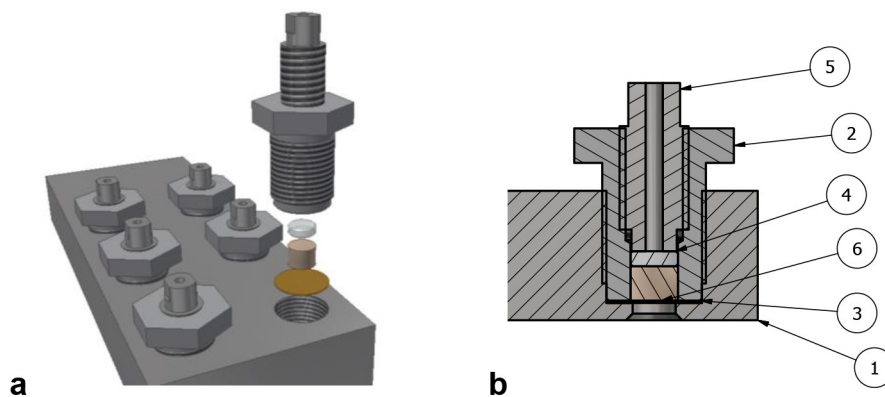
a) Exploded diagram overview of initiator test assembly having six test sites, b) Components of the first phase initiator test assembly: 1) base plate, 2) bursting disk retainer, 3) bursting disk, 4) glass window, 5) closure plug, and 6) explosive test specimen.
